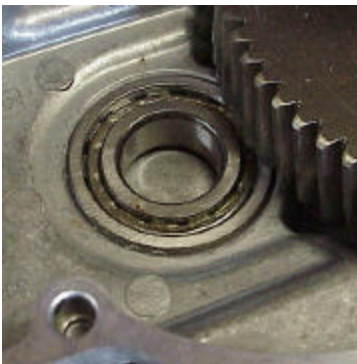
Be sure to install the Bushing/Collar in the bearing located next to the large gear. On some ratios this cannot be done after the gear is in place.
